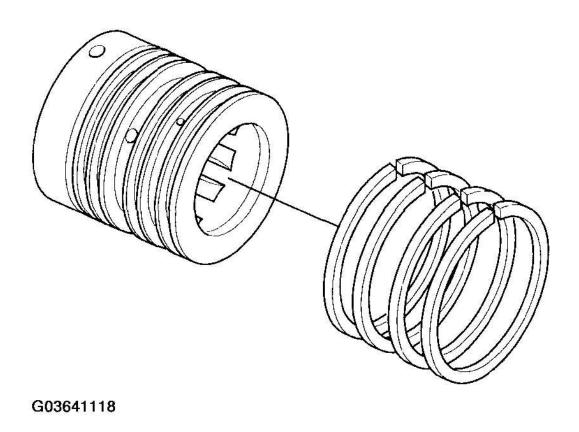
Removing Four Seal Rings From Sleeve Courtesy of AMERICAN HONDA MOTOR CO., INC.
